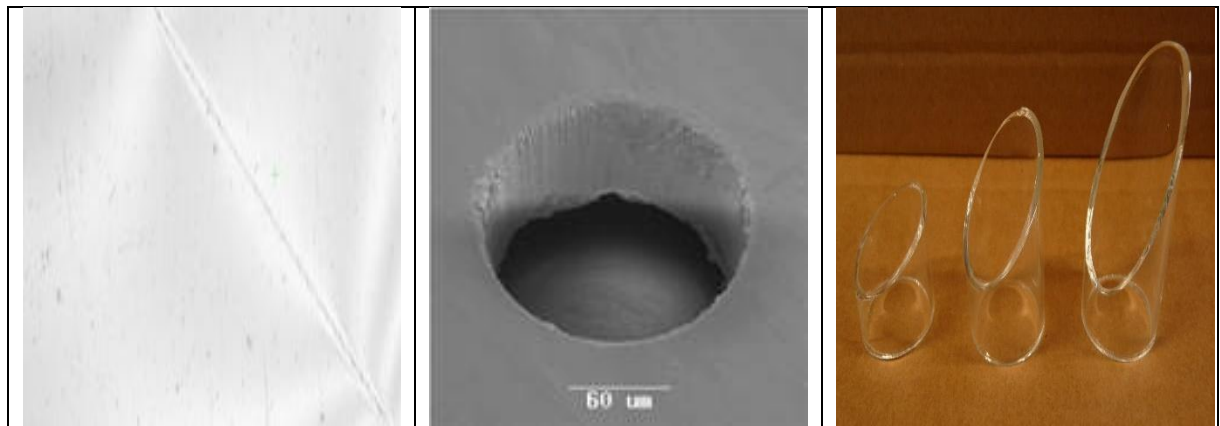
Filament line, drilled hole and bevel cuts ($\varnothing 36$ mm), using TLS process
